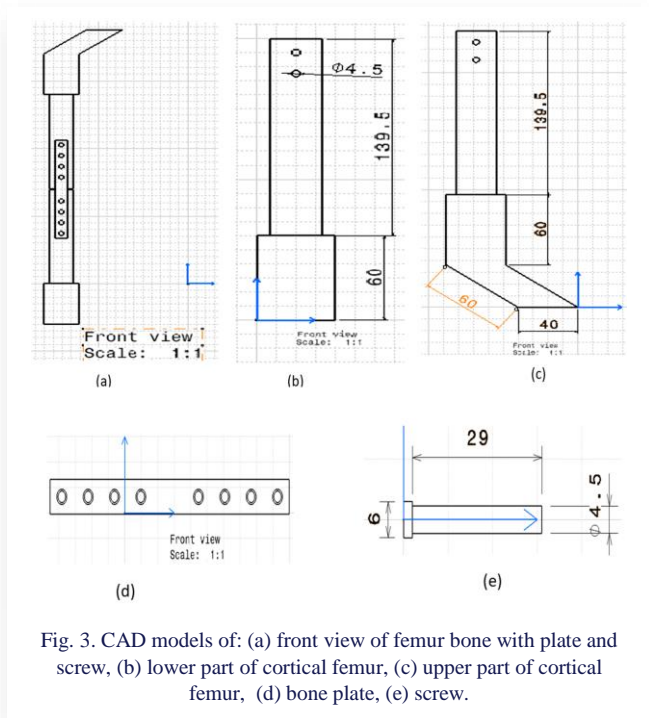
CAD models of: (a) front view of femur bone with plate and screw, (b) lower part of cortical femur, (c) upper part of cortical femur, (d) bone plate, (e) screw.
